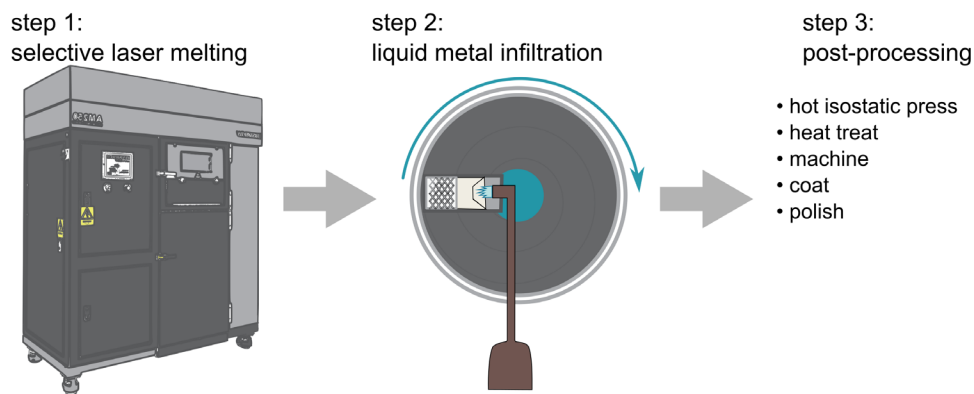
Process for synthesizing AM interpenetrating phase composites using the PrintCasting technique. The model is printed using a selective laser melting process, filled with liquid metal using centrifugal casting, and then post-processed to optimize the properties. Source: ORNL.
